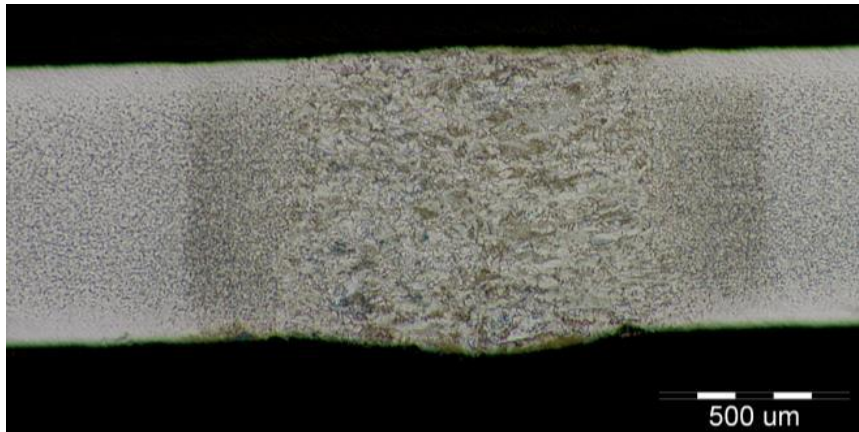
Macrostructure of sample A welded joint (HSLA)
